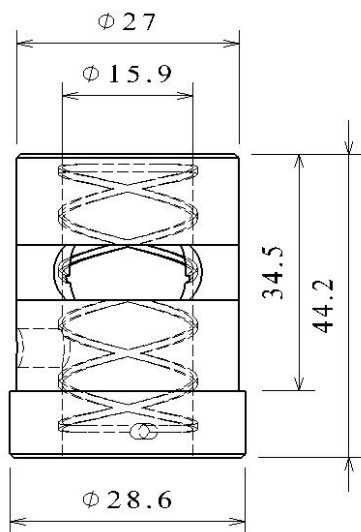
3D CAD (transparent) model of radial bearing, dimensioned.
